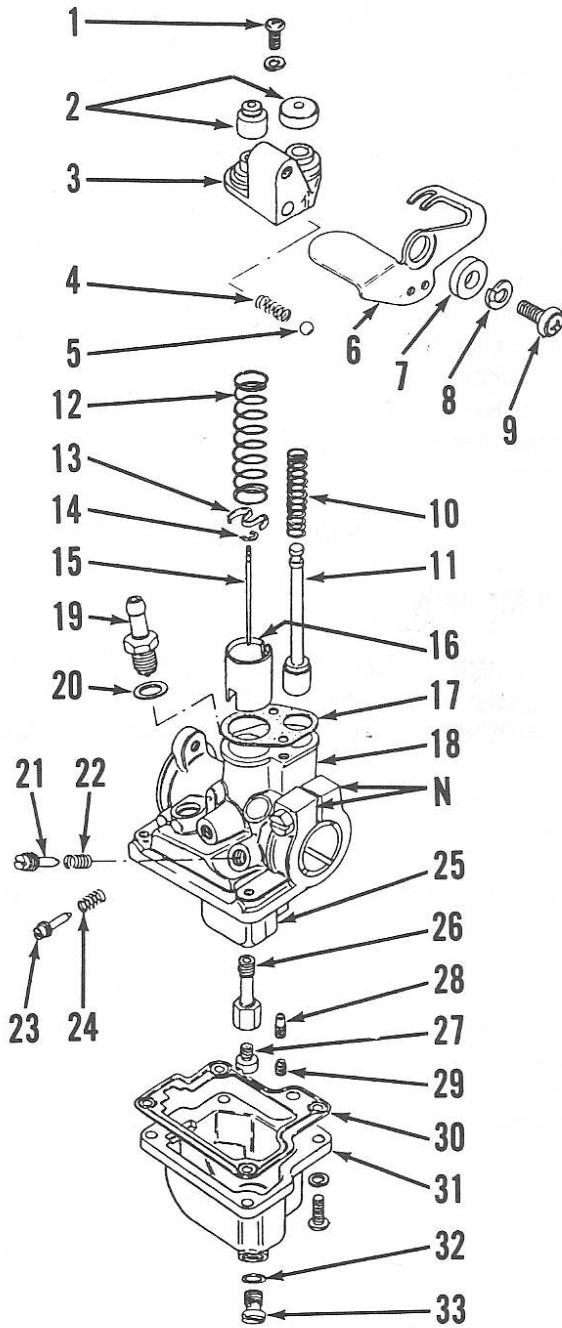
Exploded view of Mikuni VM12SC carburetor used on both models. Carburetor identification number is located at (N).
